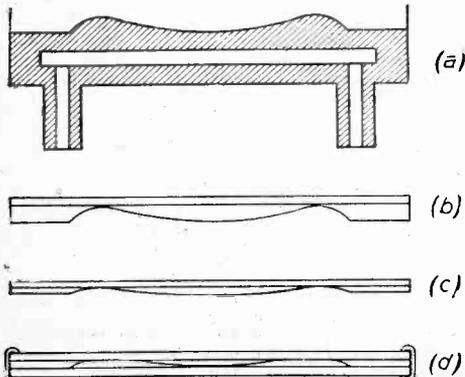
Manufacture of gelatine correction lens; (a) Mould; (b) Wet gelatine; (c) Dried gelatine; (d) Completed lens.
